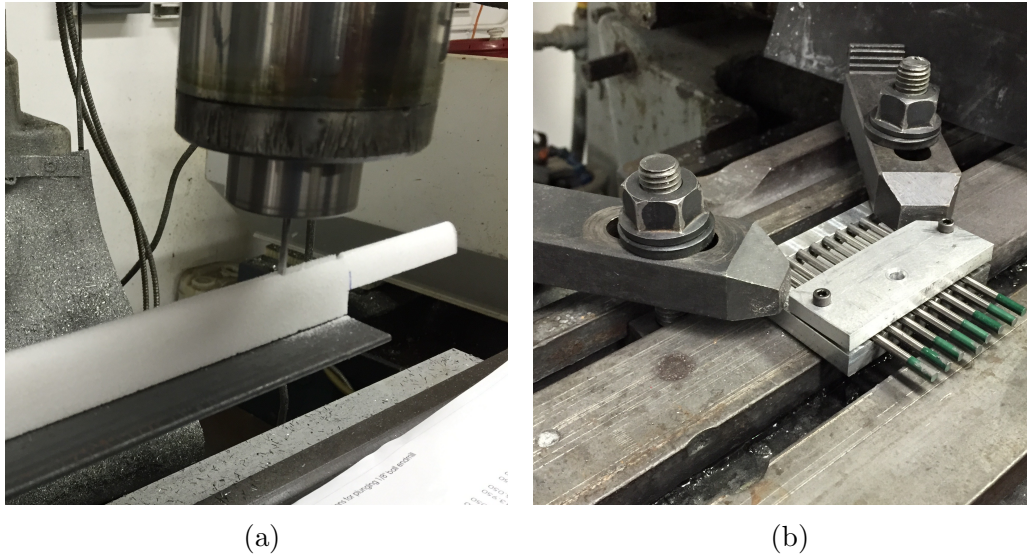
Foam core and insert machining, (a) Milling leading edge slots for tungsten inserts, (b) Cutting tungsten leading edge masses to length using diamond cutting wheel
